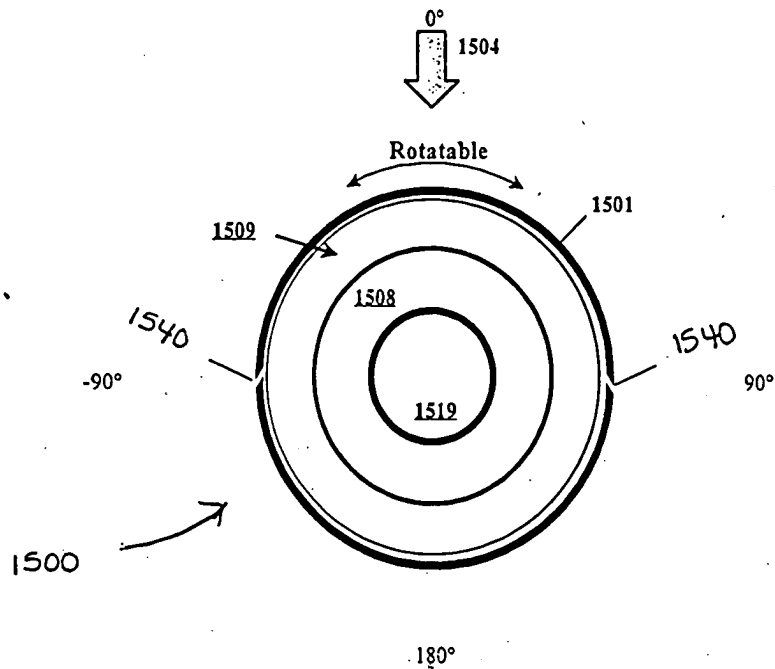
C Drilling Riser BLC, Telescoping Sheath Section
